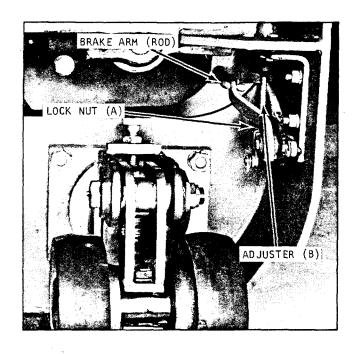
Brake Cylinder, Pivot Arm and Pedal Rod Adjustment
